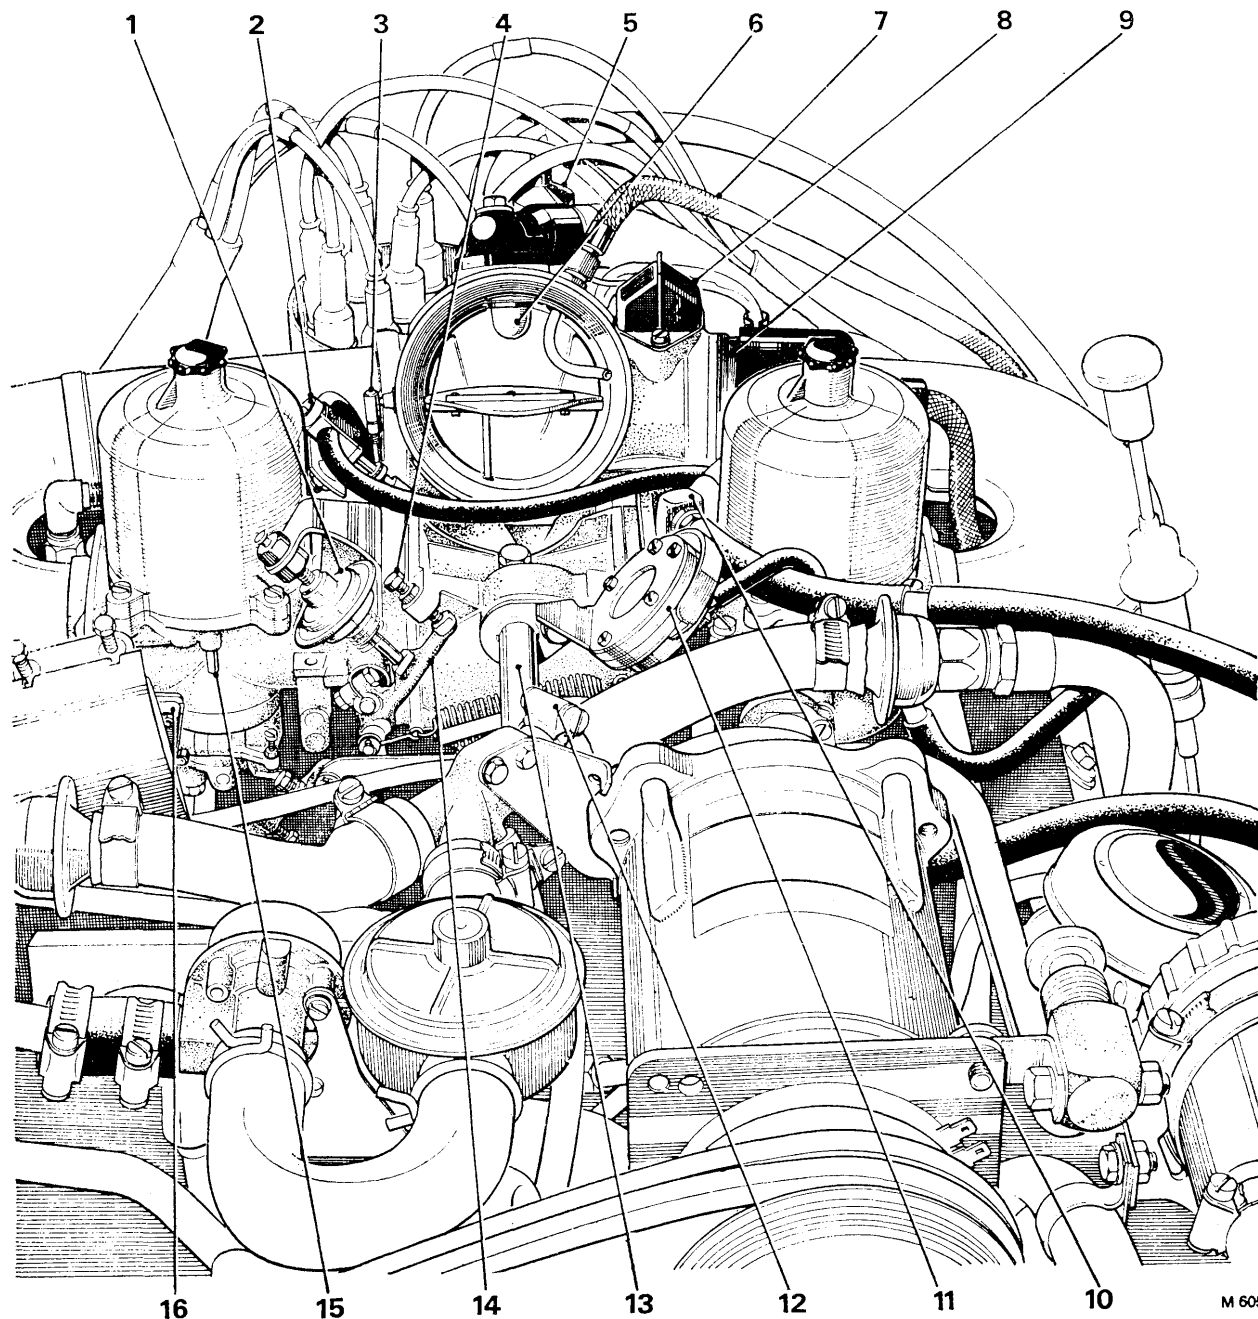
VIEW OF CARBURETTERS (Current Cars)
